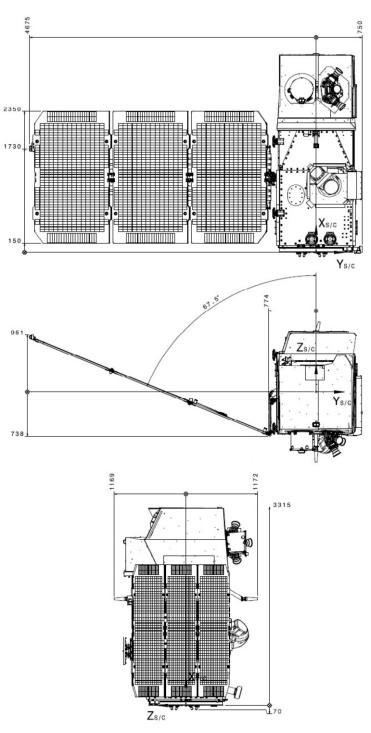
Sentinel-2 drawings: deployed and stowed configuration
